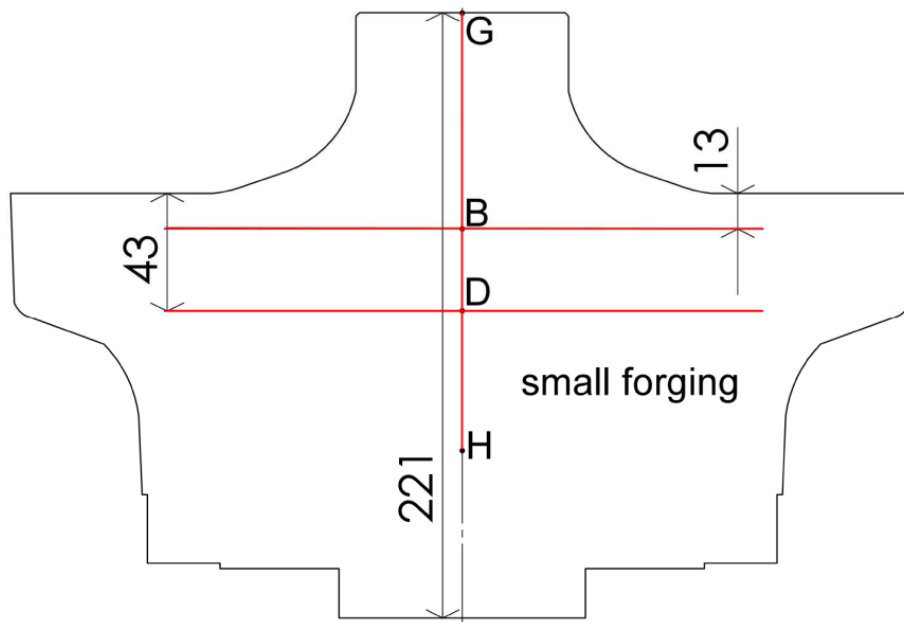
Geometry of small forging showing the three scanlines for ND measurements. Dimensions in mm.
